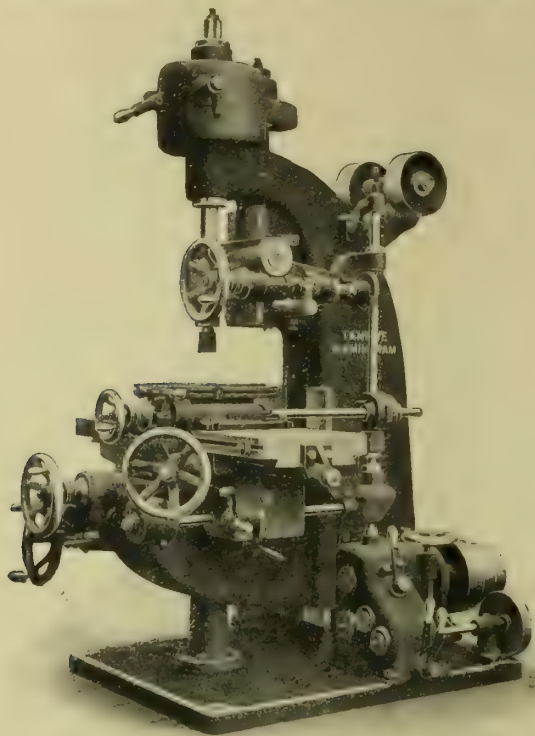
No. 3 VERTICAL MILLING MACHINE. MESSRS. TANGYES, LTD., BIRMINGHAM.
